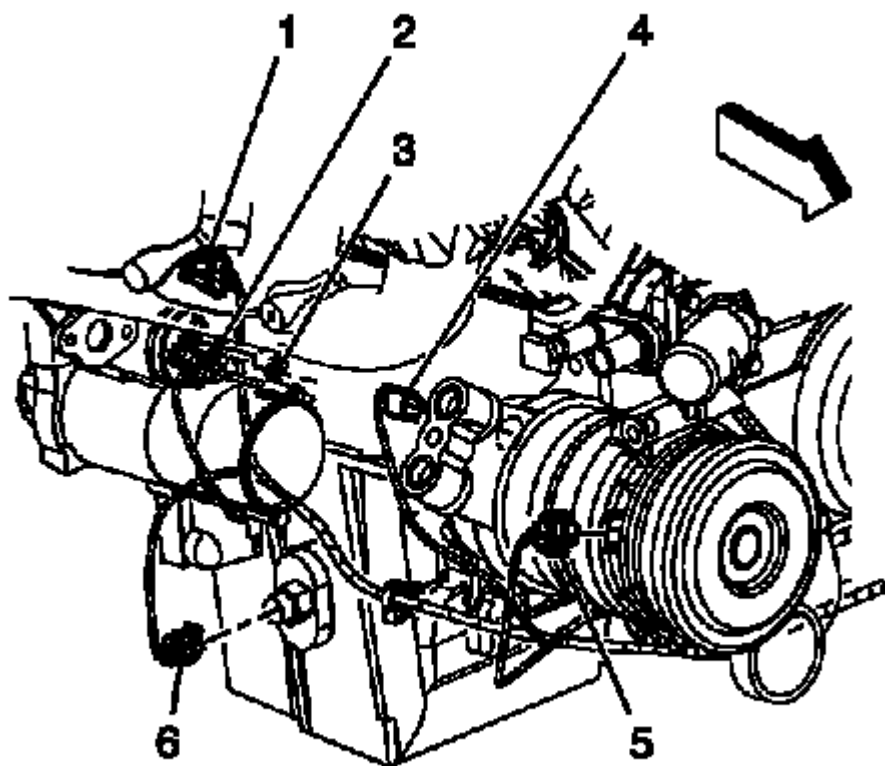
View Of Positive Battery Cable Clip & Bolt
